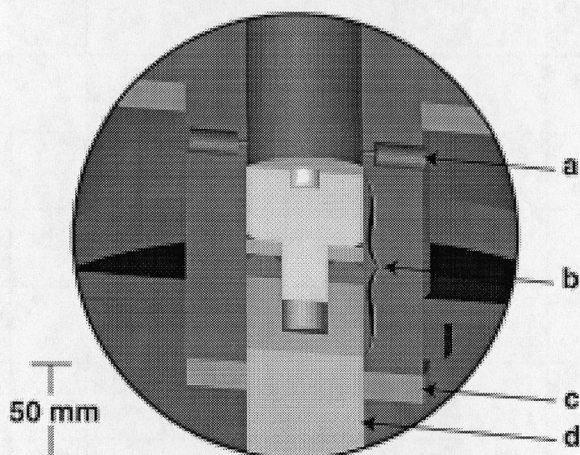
(a) Gas input to the UHP vessel, (b) Bridgman moving seal assembly consisting of the mushroom, anti-extrusion rings, packing, follower, and base, (c) Alignment bushing to locate the UHP piston, and (d) UHP piston.
